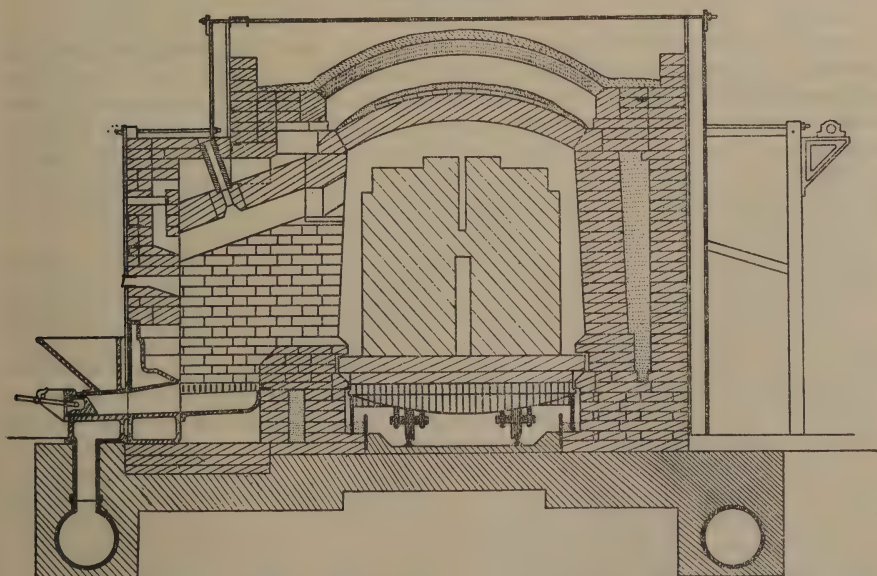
Continuous car tunnel kiln: open flame, using mechanical stokers, for firing building bricks or firebricks.
